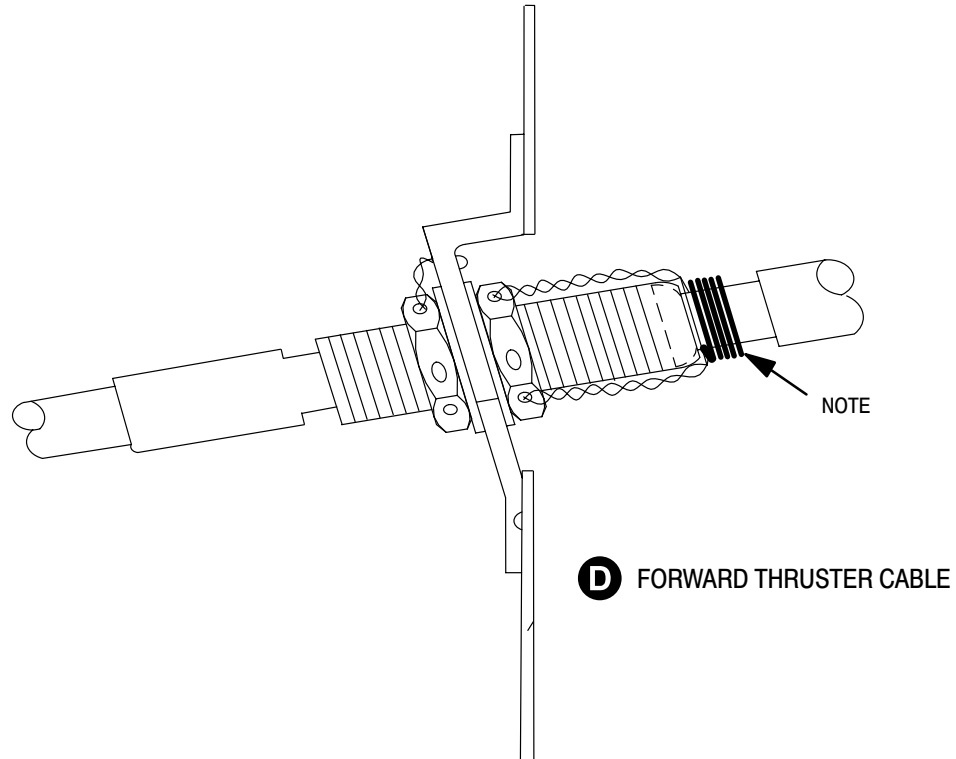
Forward and Center Cable Relief Area Inspection (Sheet 1 of 2)
